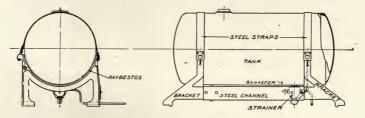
U. S. Pressed Steel Tank and Mounting.
